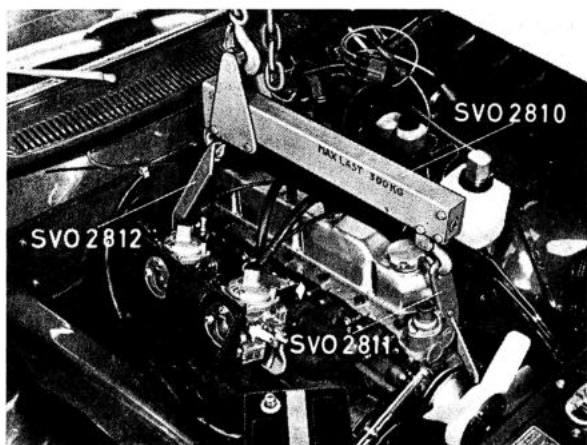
Lifting out the engine with lifting tool SVO 2810
